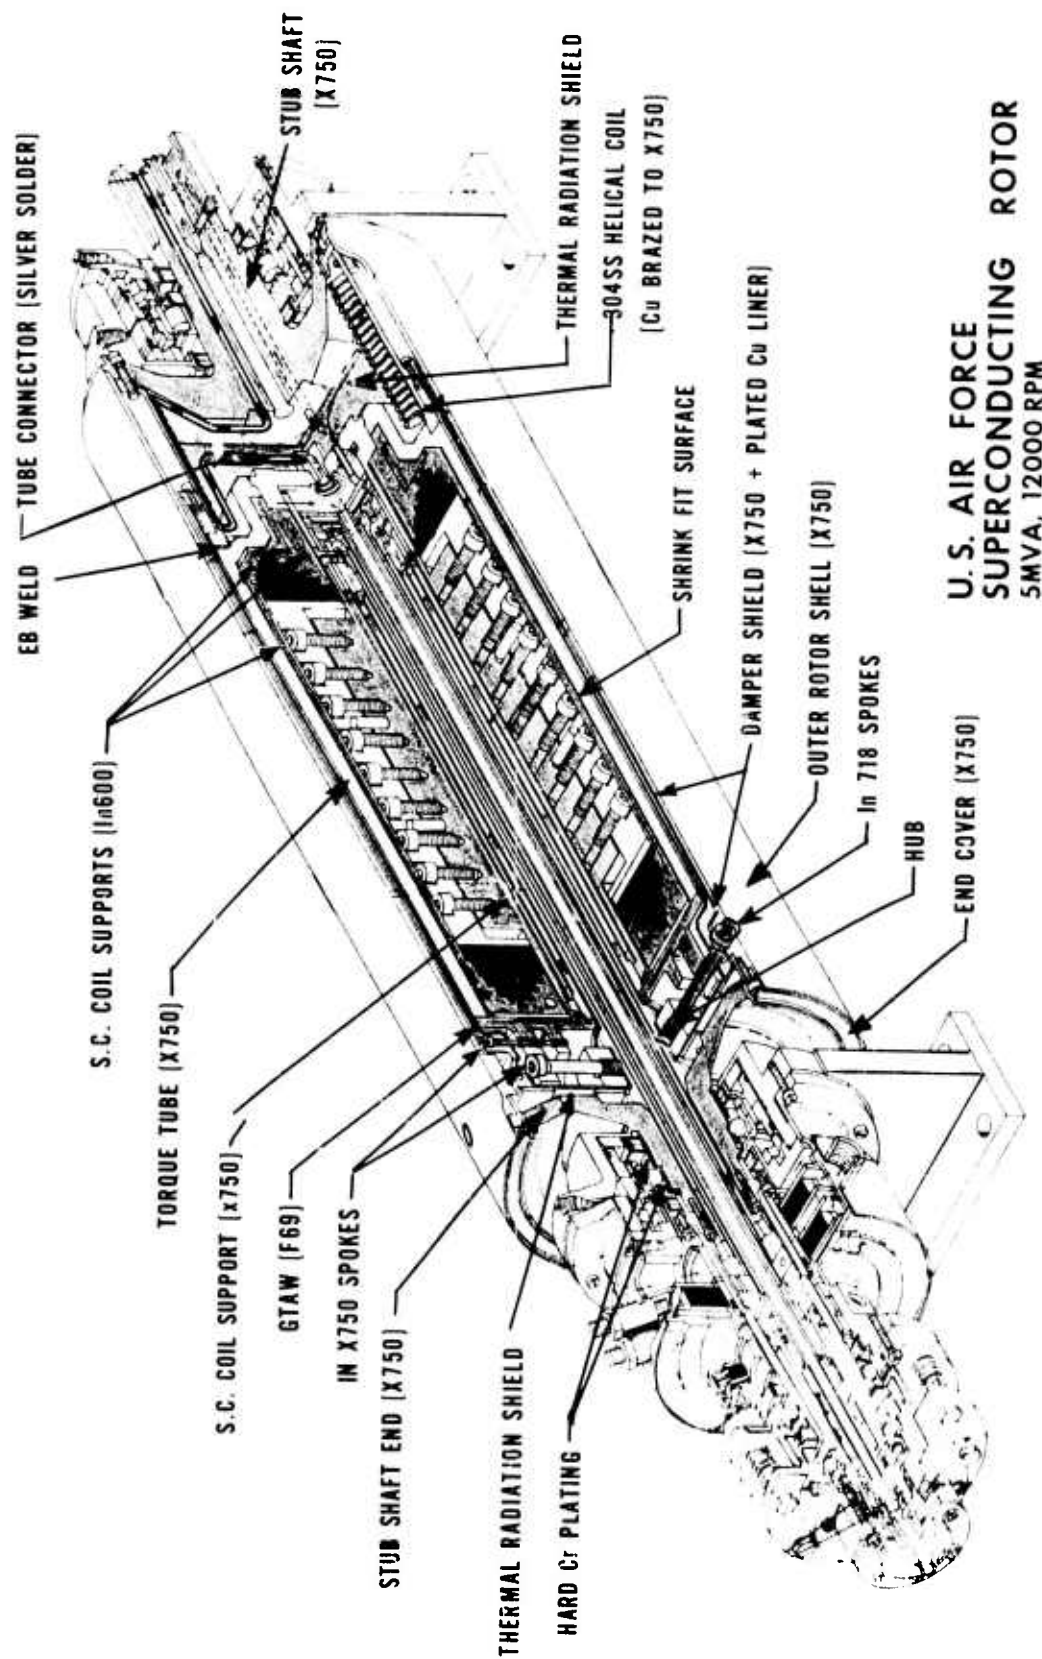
Prototype superconducting generator rotor assembly indicating structural materials utilization and design/fabrication complexity.
